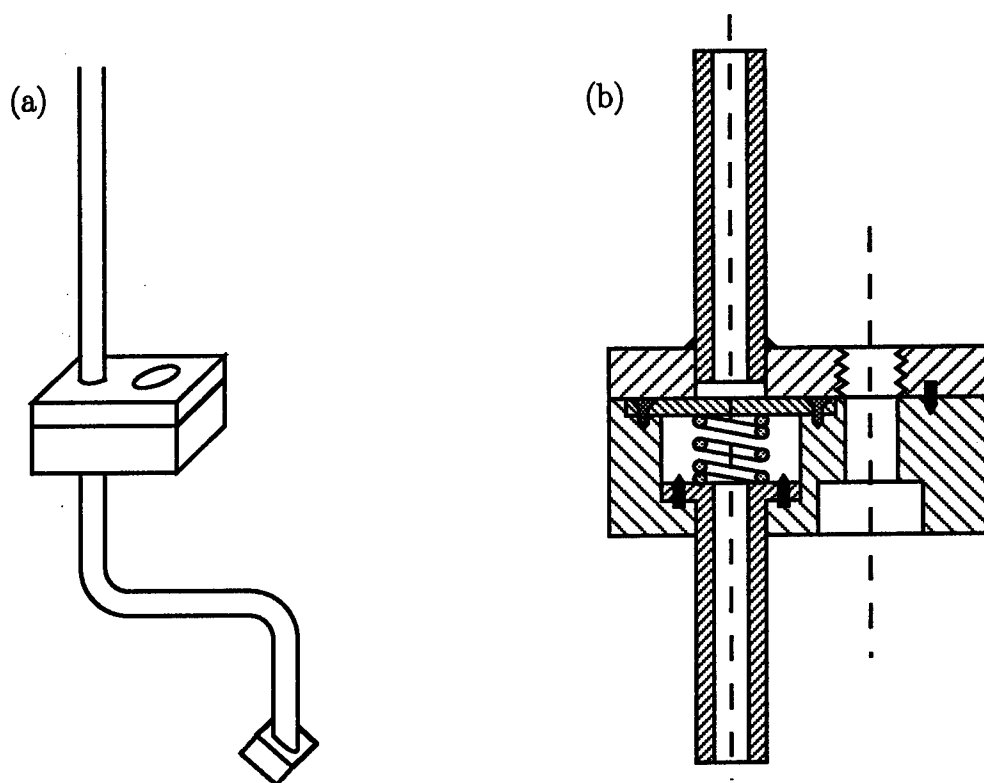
Mirror probe detail. (a) Probe (b) Mechanism section detail.
